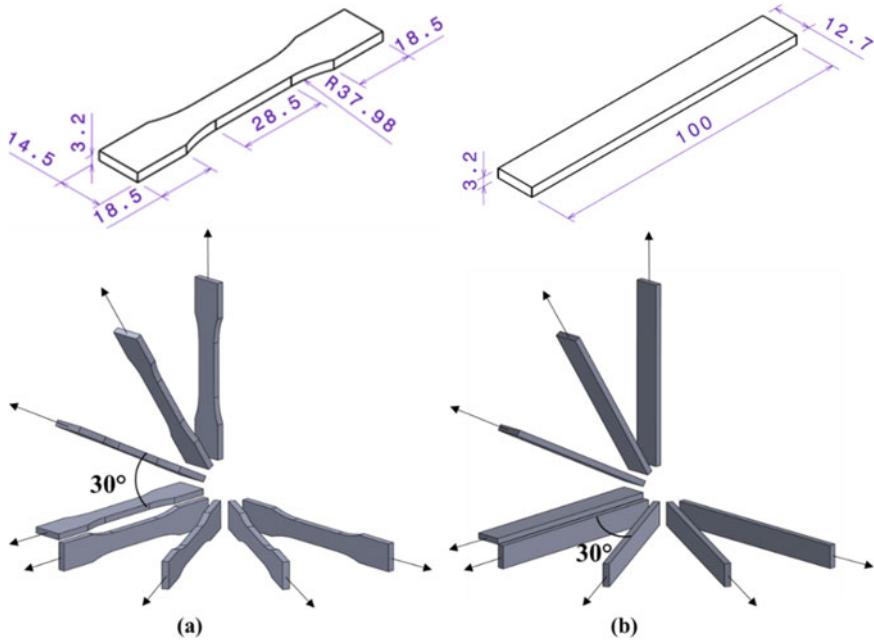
Specimen with dimensions and CAD model of 0–90° at a step of 30° oriented specimen in the horizontal and vertical direction a Tensile testing, b Flexural test (3-point bend) (All dimensions are in mm)
